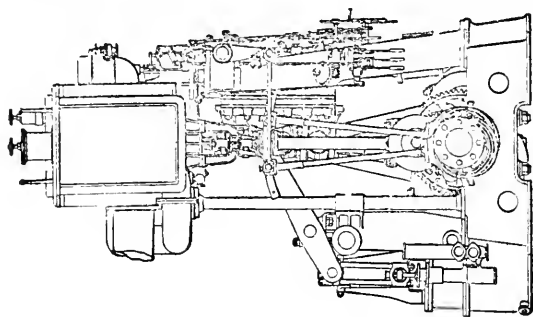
Three-crank Triple-expansion Engine, with Special Valve Gear.
